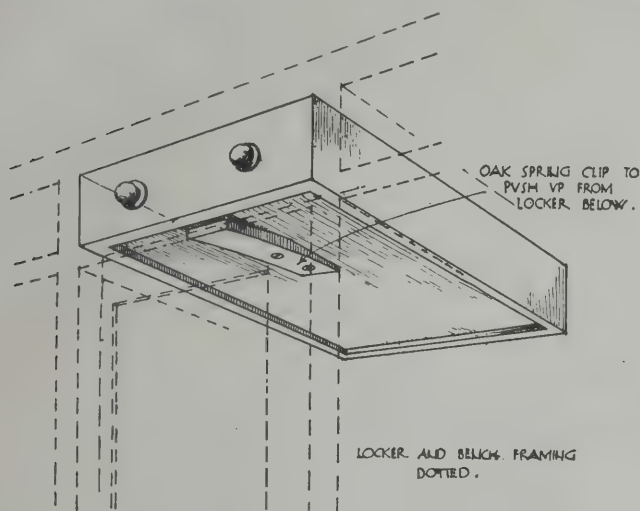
Drawer on under side of bottom, showing Spring Clip.
